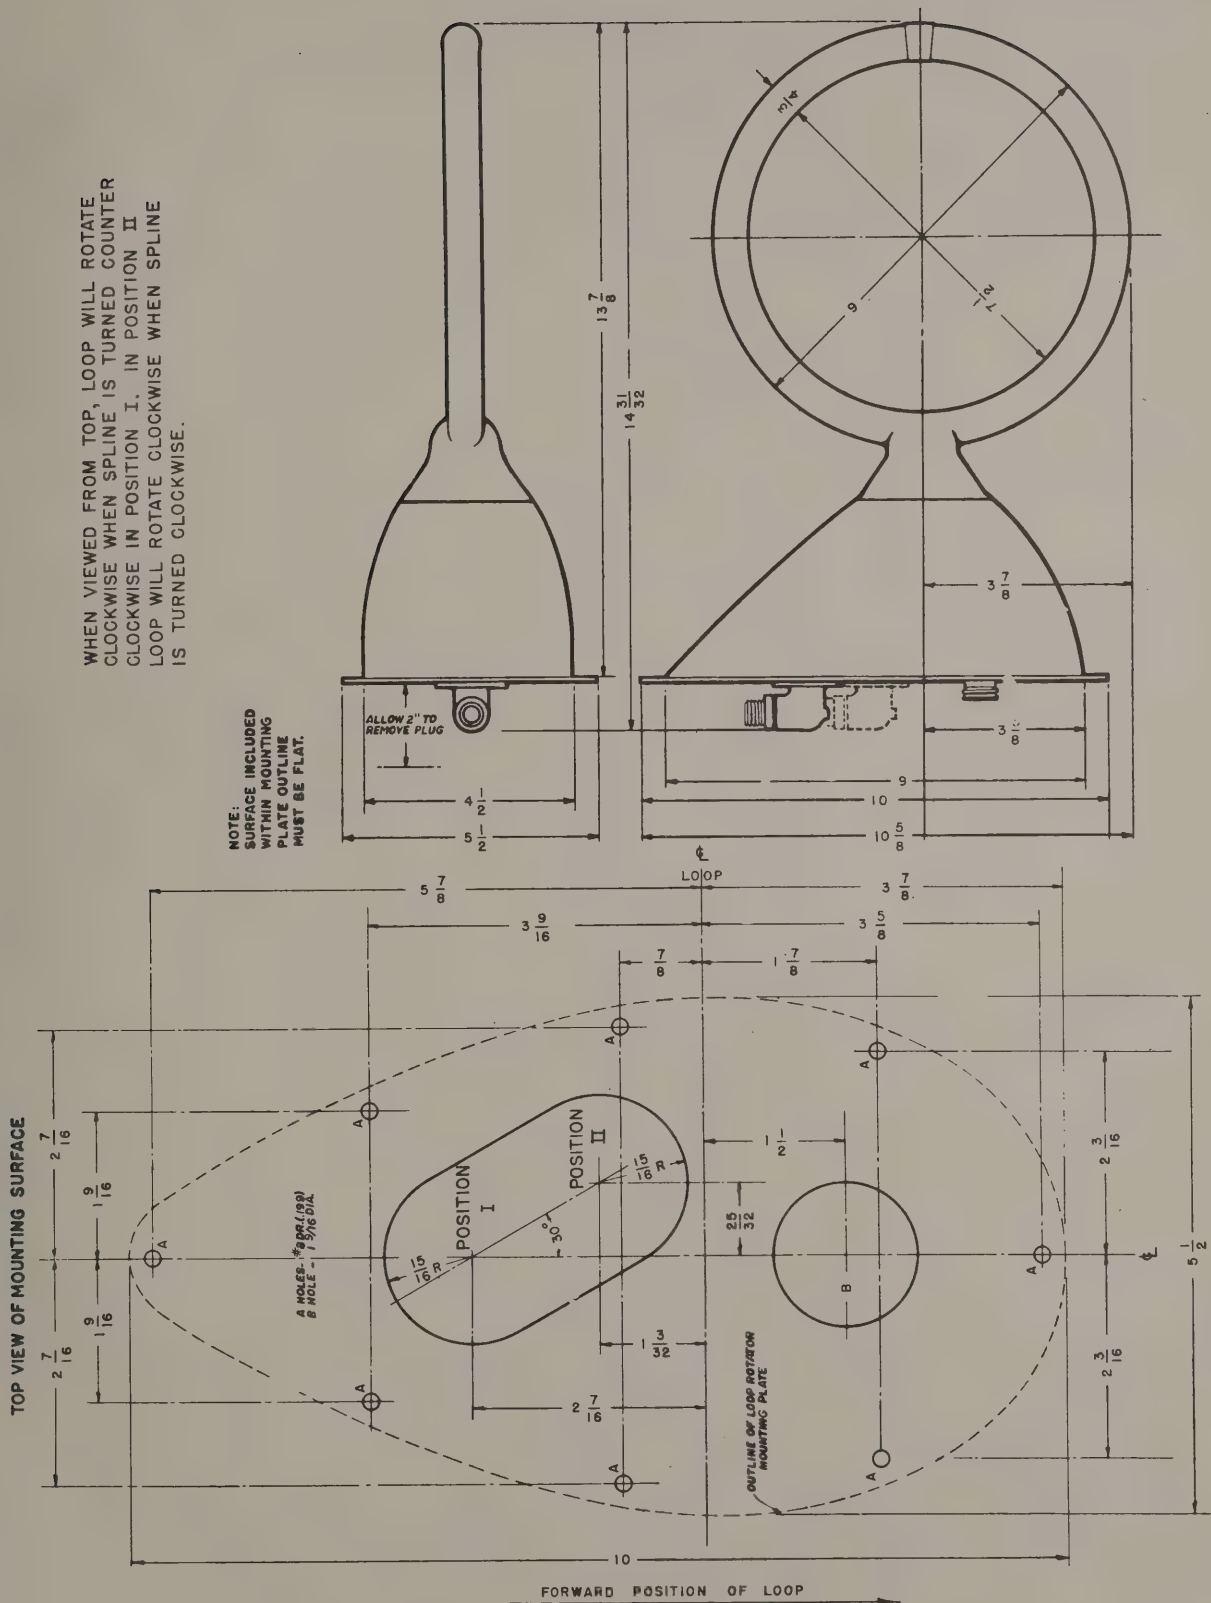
Type MN-20 Rotatable Loop, Outline and Mounting Dimensions
